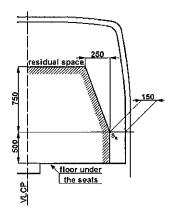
Residual space in bus cross-section [1, 2] (the dimensions are in millimeters).
